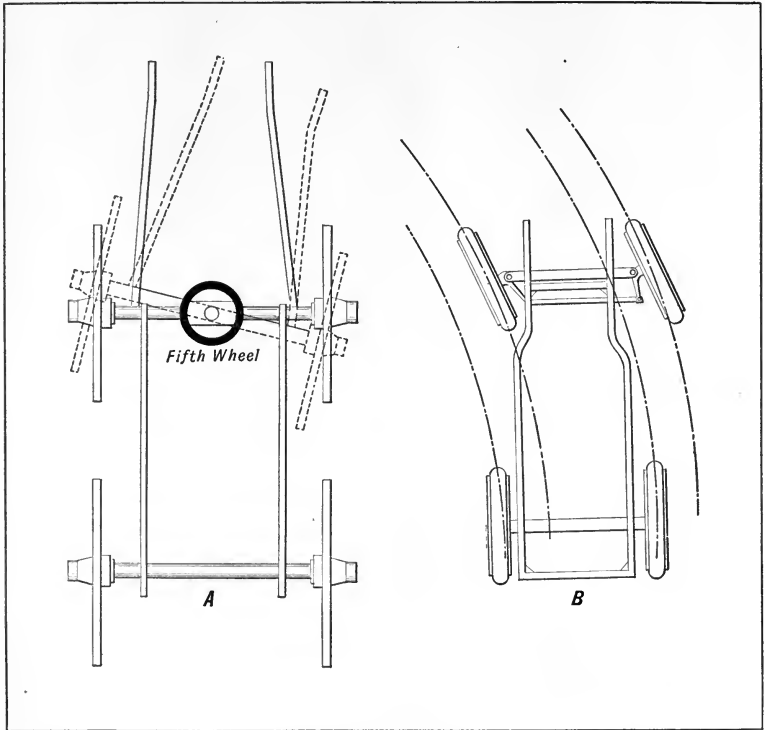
Methods of Steering Vehicles Outlined. A—Horse-Drawn Wagon Directed by Swinging Axle. B—Motor Car Steered by Movable Wheels on Fixed Axle.
